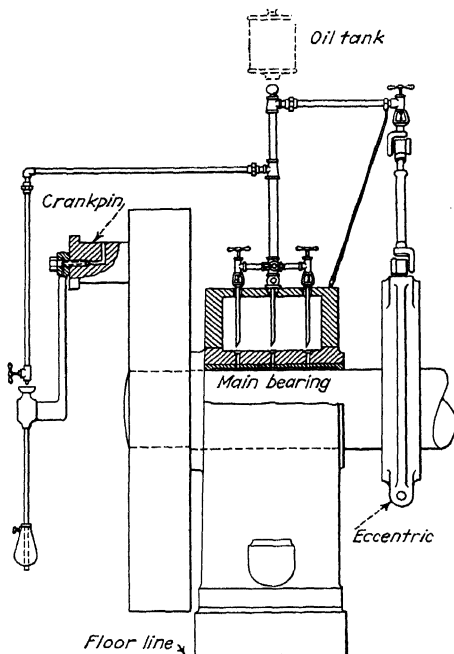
Drop-feed oiling applied to crankpin, main, and eccentric bearings of a horizontal engine.
